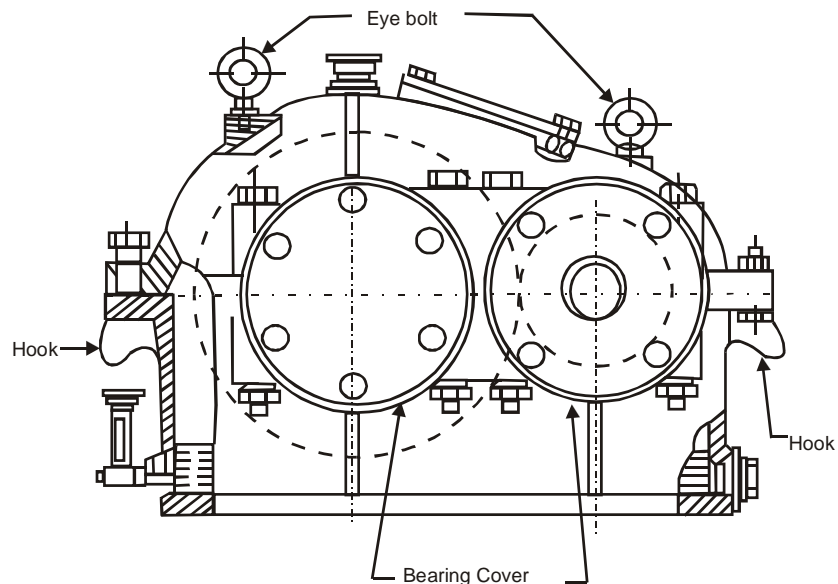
(a) : A Gear Reducer with Two Eye Bolts in the Cover (the Upper Half of the Body)
